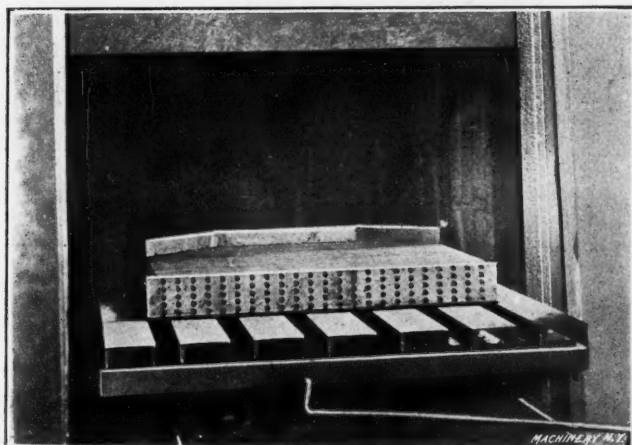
Fusing the Solder-covered Tubes with the Fins
